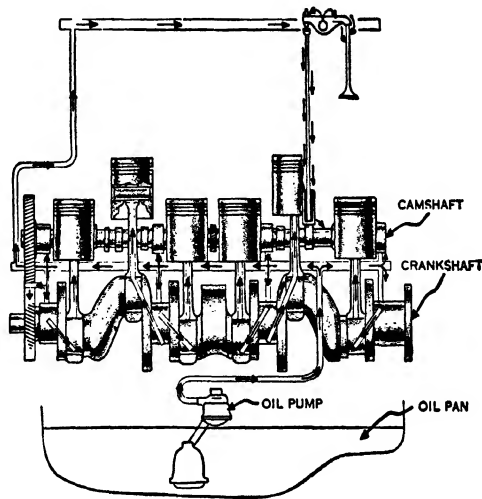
Oil pressure system. (Courtesy General Motors Corp.)
